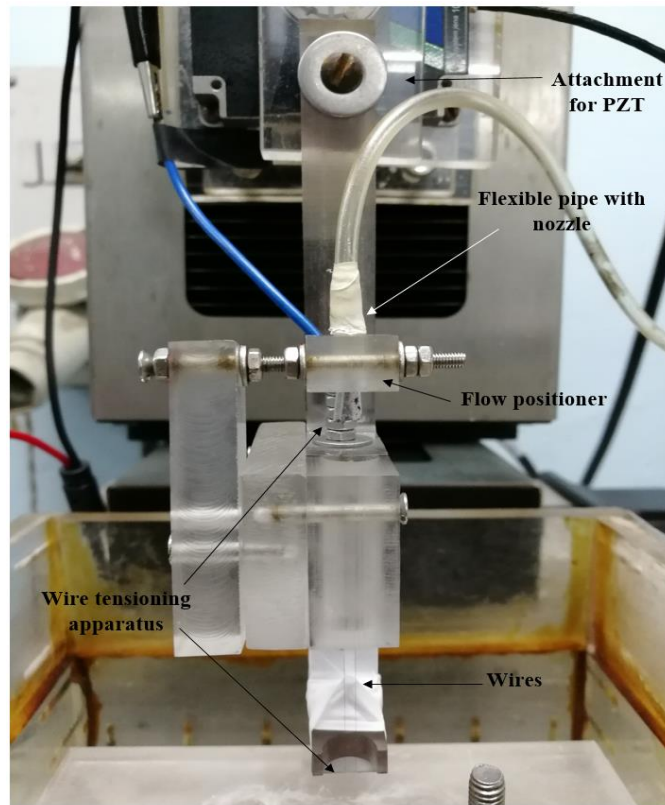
Photographic view of the developed Multi-wire holding block
